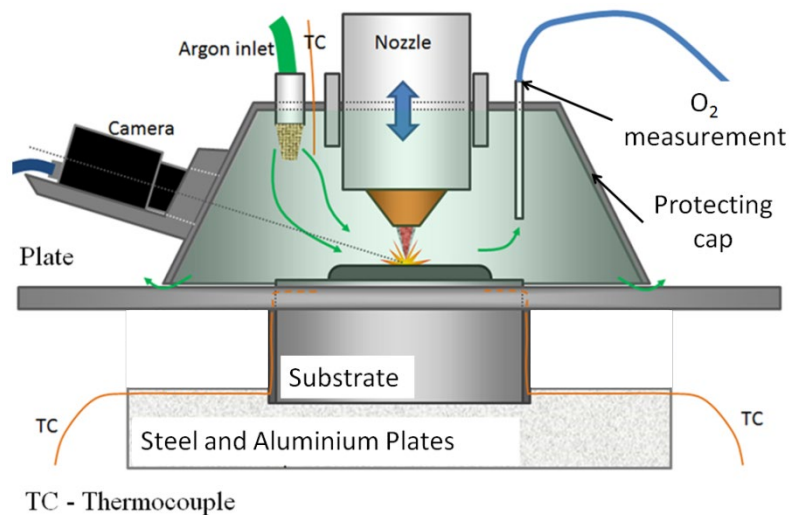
Scheme of laser cladding equipment used for manufacturing the studied specimen.
